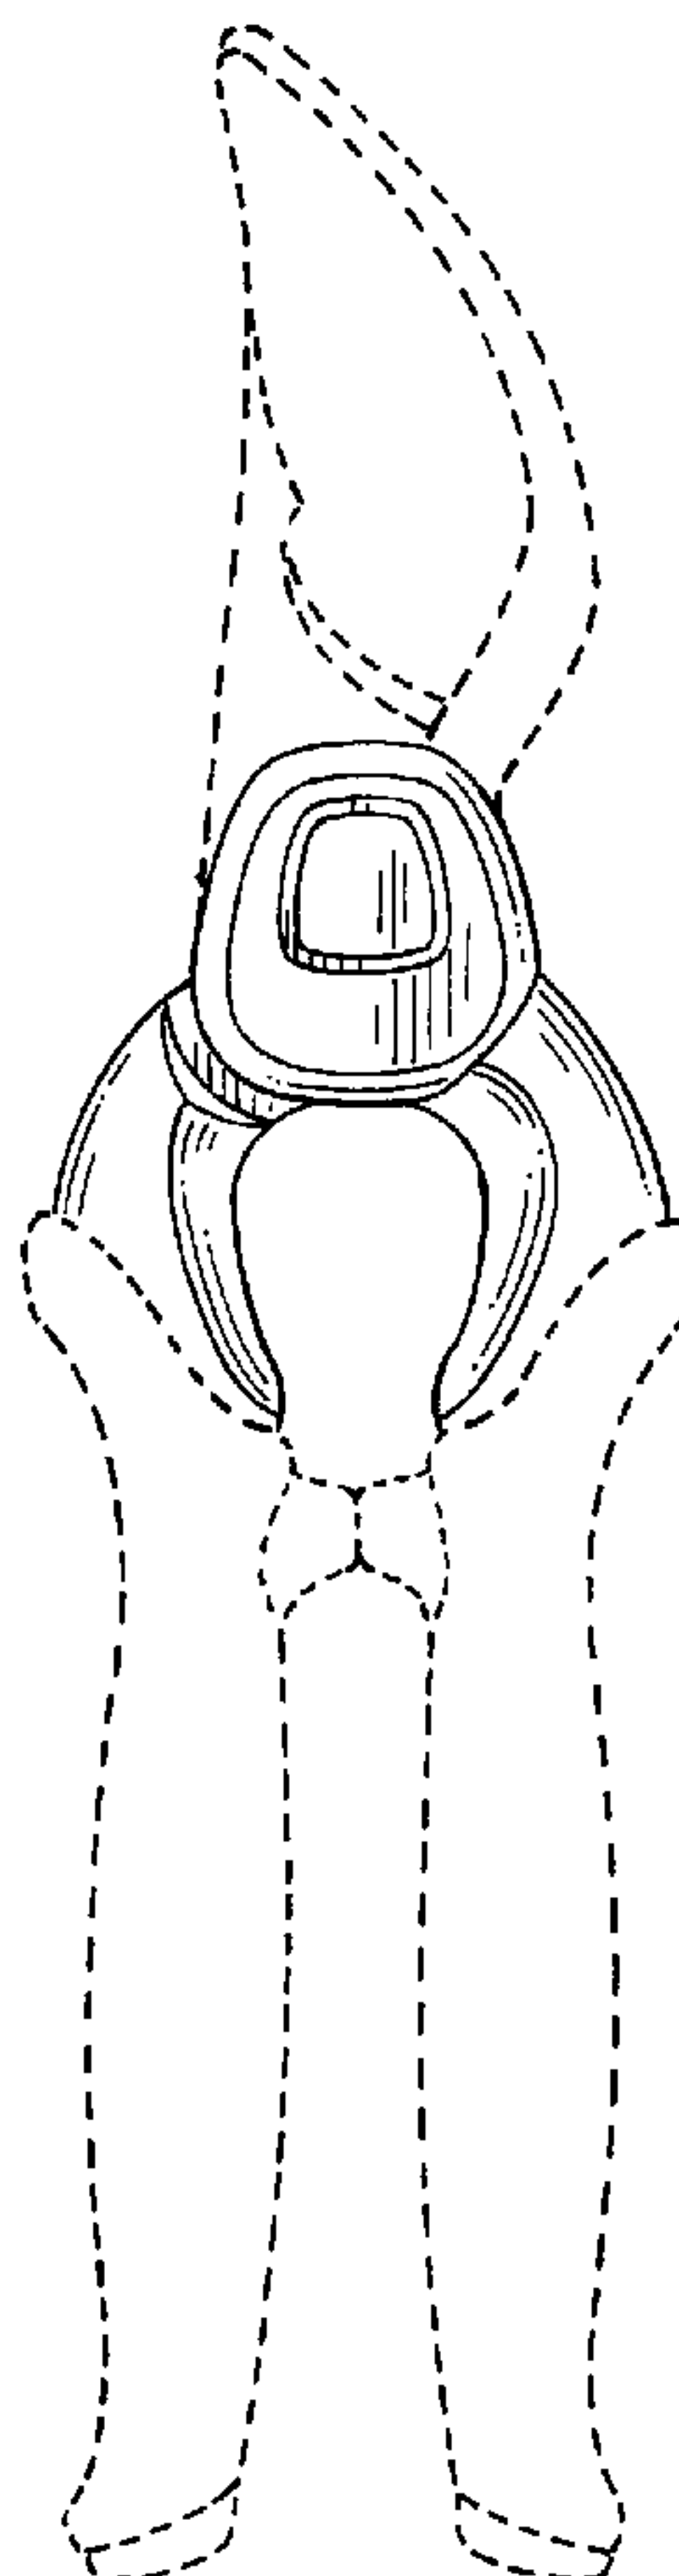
is a back view of the hand operated cutting tool of the claimed design.
